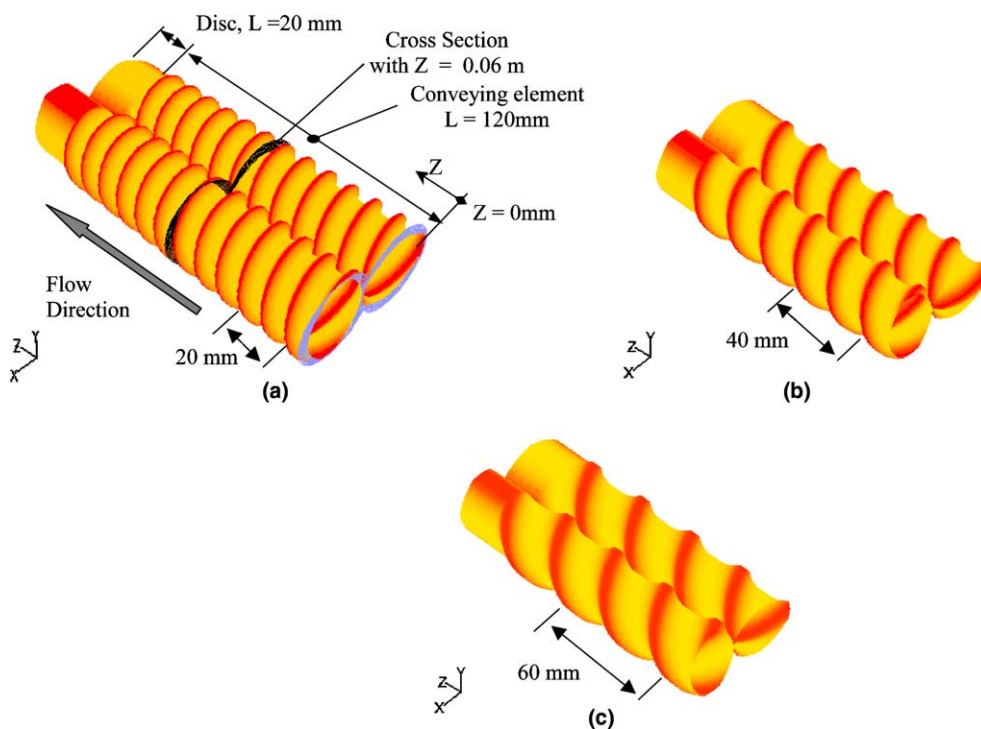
Geometry of conveying elements: (a) SE20, (b) SE40, (c) SE60.
